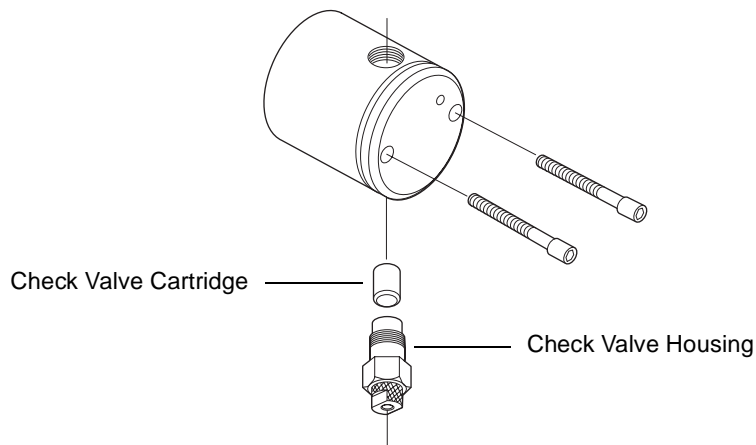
Check Valve Housing and Check Valve Cartridge
